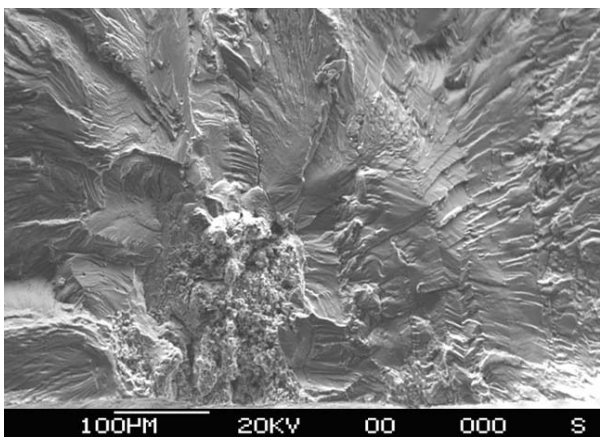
Typical 7050-T7451 corrosion pits on a coupon bore surface – 24hrs at 3.5%NaCl. In both cases the corrosion pits initiated a fatigue crack.
